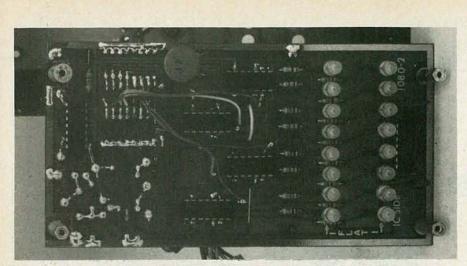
"COMPONENT-SIDE" of display board. Mounting of LED's will be described in next part of article—don't install them without reading it.
